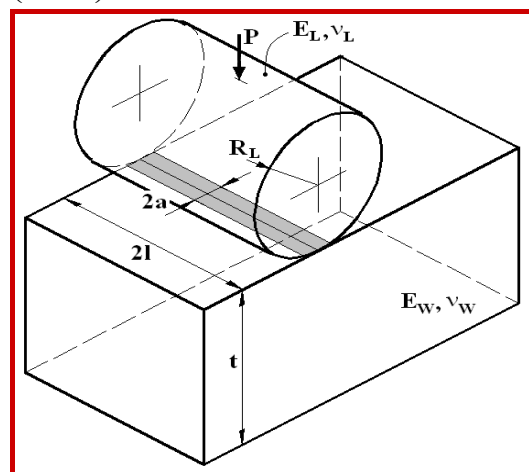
Contact between a cylindrical locator and a rectangular workpiece
